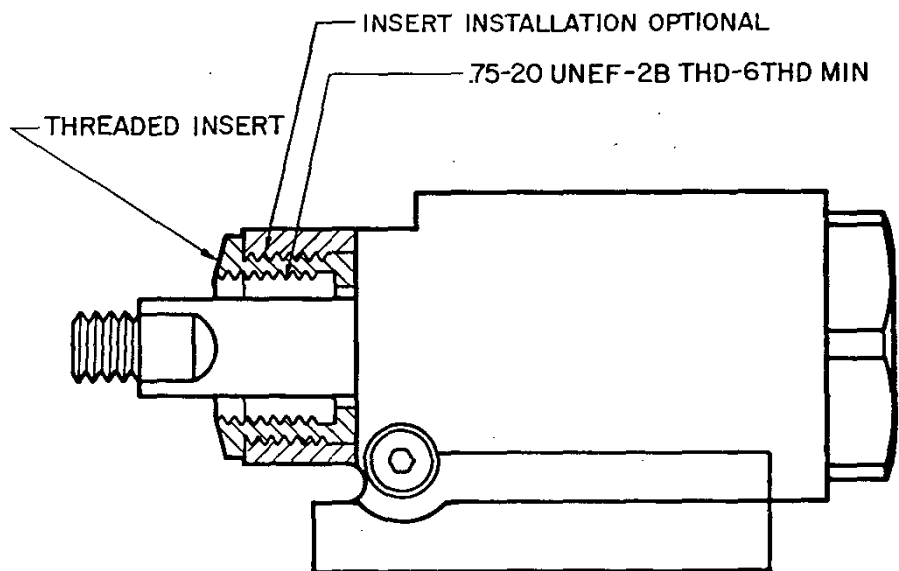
Head assembly with threaded insert, side view cutaway.
